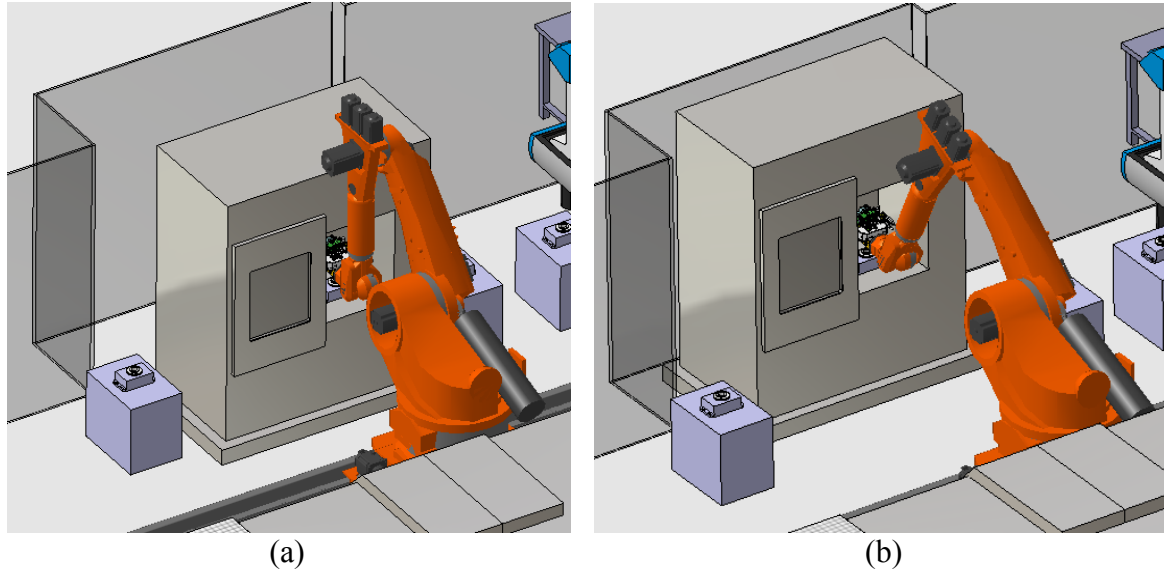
Washing machine (a) too close to the robot. (b) properly distanced.
